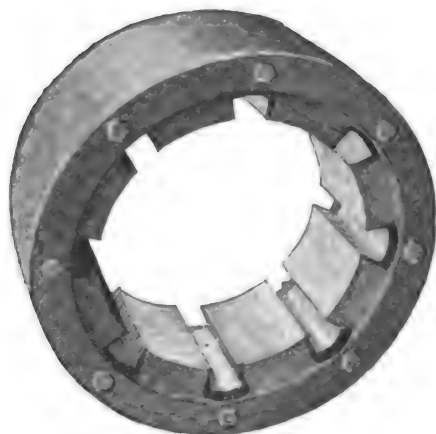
STATIONARY REMOVABLE RING ARMATURE.
